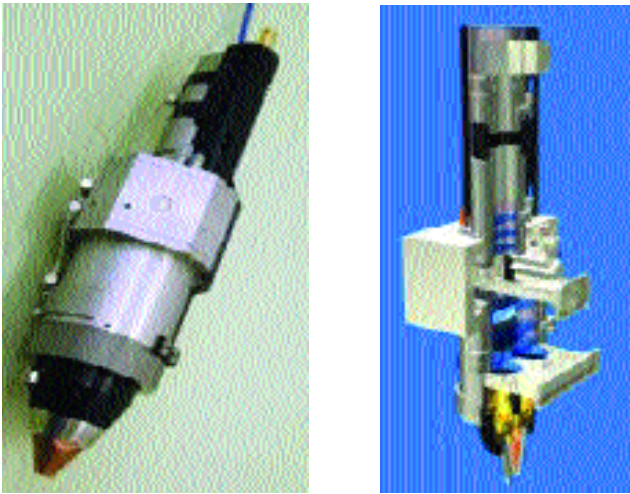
Appearance and cut model of coaxial MIG-YAG hybrid laser head
